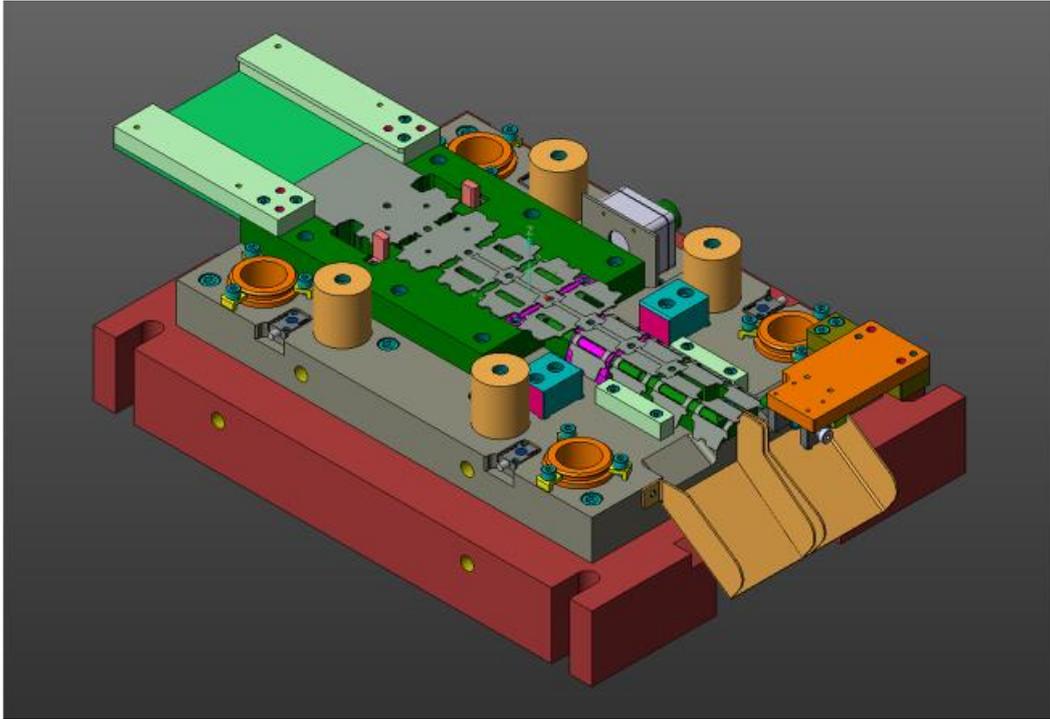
3D model of the progressive die used for the production of a component for Stage 2 assembly (lower part) [7]
